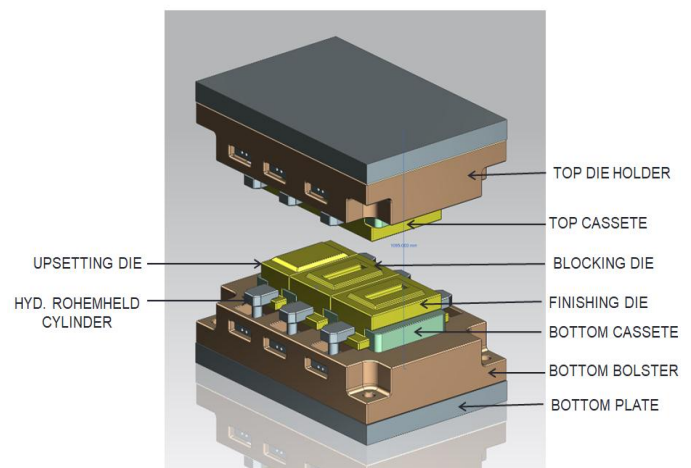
Modified Die Holder Using Swing Clamp For Die Clamping
